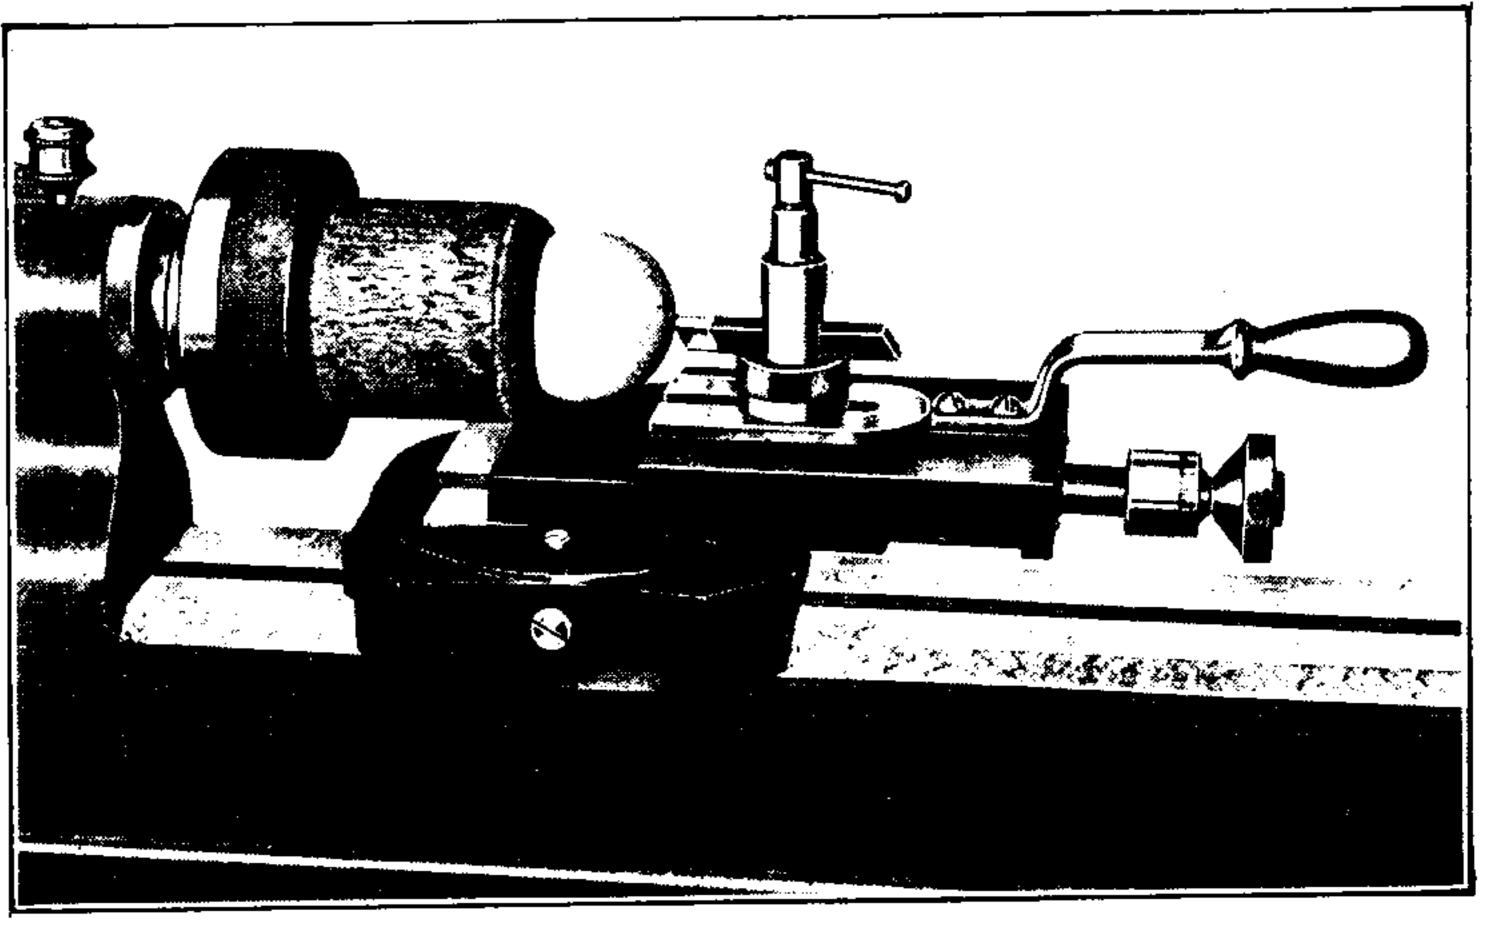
Rivett Ball Turning Rest arranged for finish turning ivory billiard ball held in chalked wood chuck
